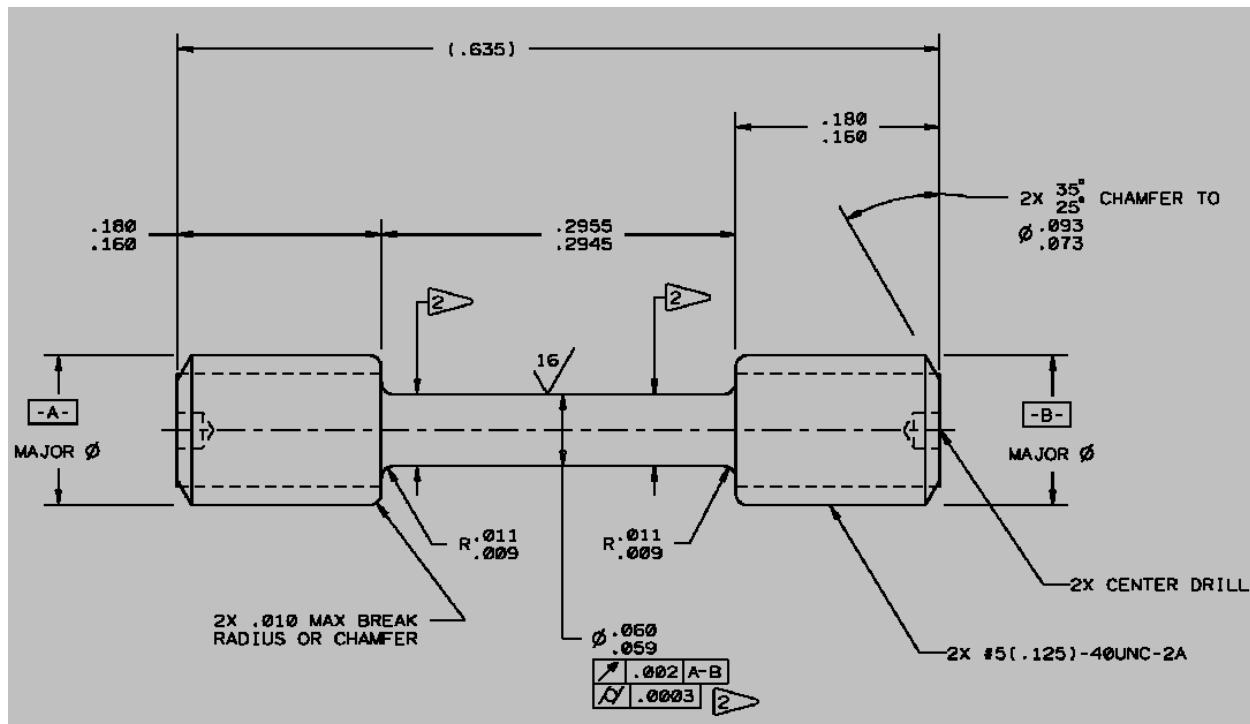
Miniature tensile bar dimensions per KCP drawing 1470302.
